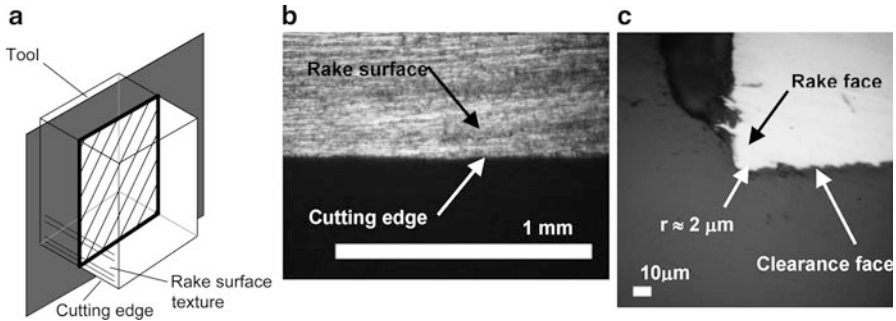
Control of the cutting edge radius: (a) Schematic representation of the cross section of a tool; (b) Microscopic photograph of the rake surface next to the cutting edge; (c) Detail of the tip of the tool showing the radius of the cutting edge
